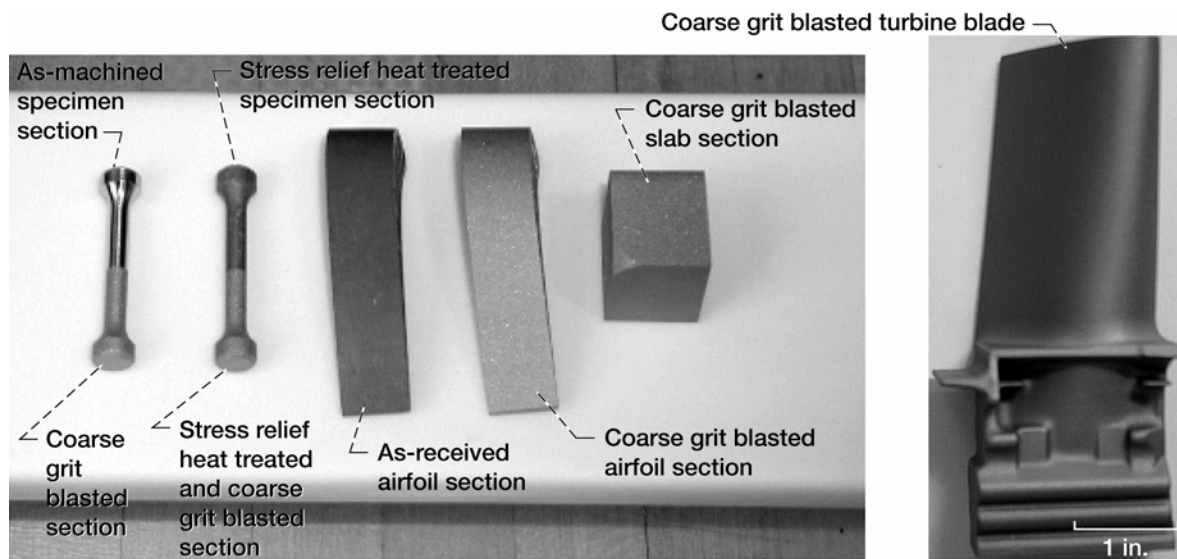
Machined test specimens, airfoil sections, slab section, and full size turbine blade were prepared with various surface finishes prior to carburization. Note that each half of the machined test specimens has a different surface treatment.
